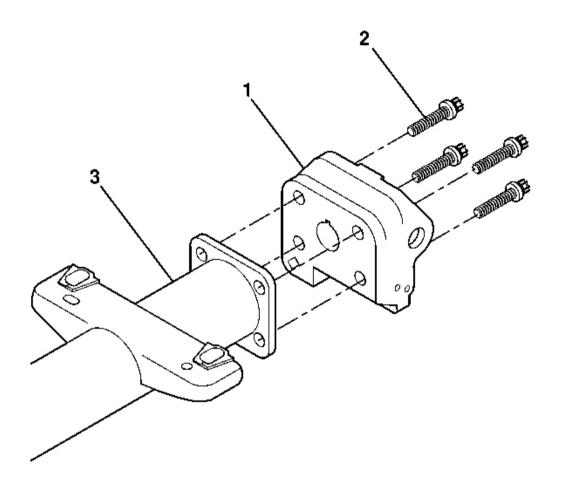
Attaching Steering Column Support Assembly To The Steering Column Jacket Assembly With 4 TORX(R) Head Screws (Column Shift Lean Shaft) Courtesy of GENERAL MOTORS CORP.
